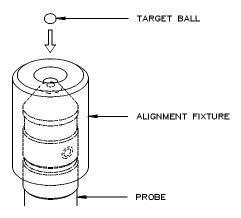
Alignment of Target Ball in Fixture on Probe
